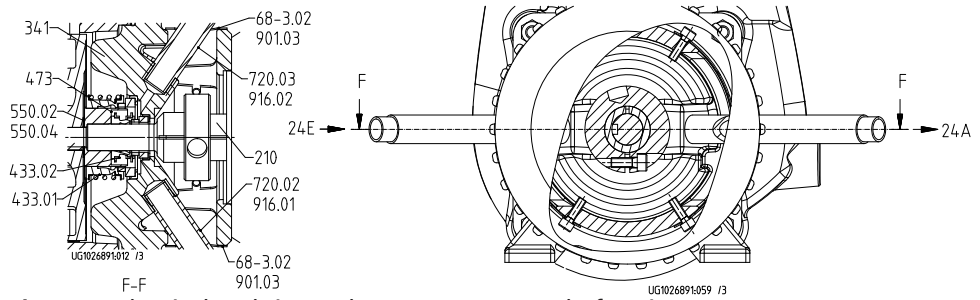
Mechanical seals in tandem arrangement, shaft unit 17
